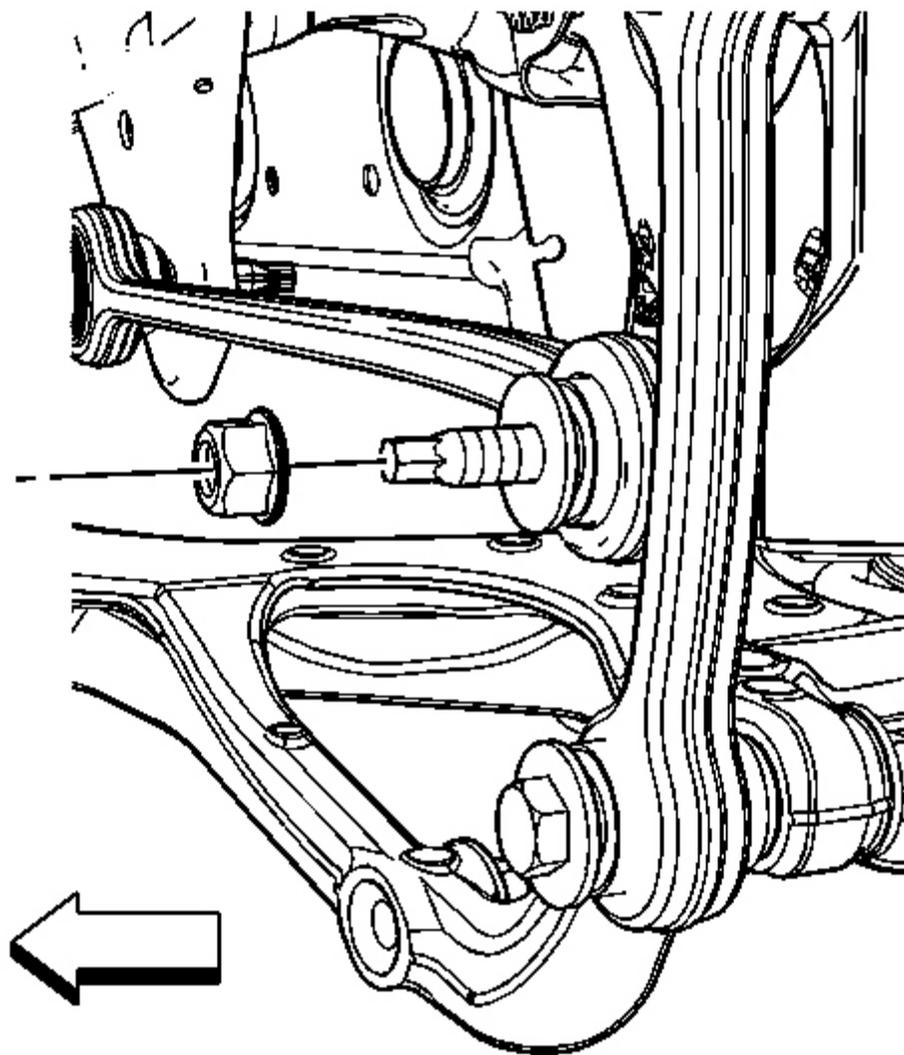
Identifying Adjuster Bolt In Mounting Bracket & Adjuster Link
